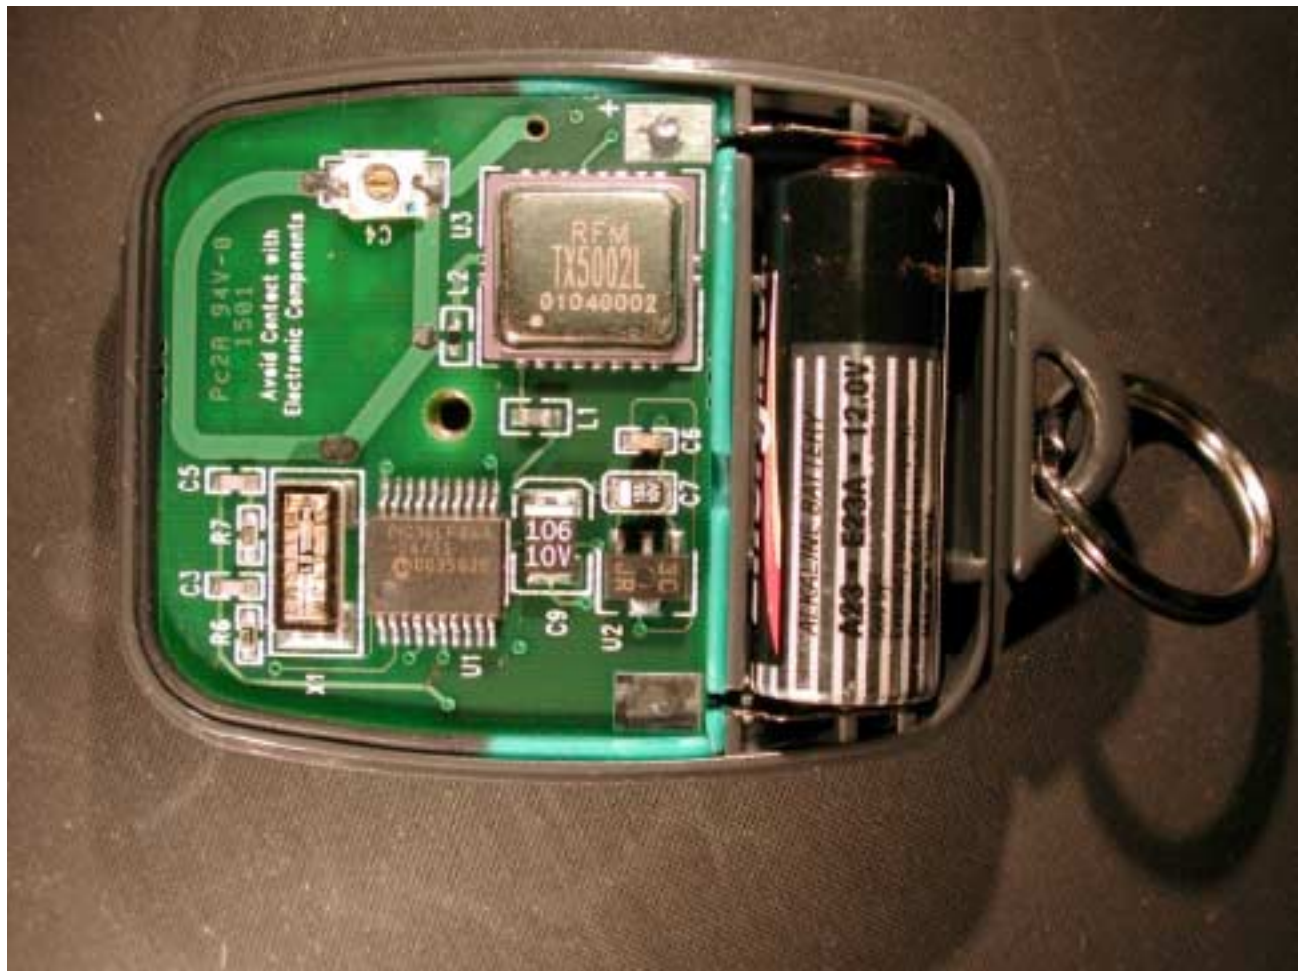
MMT500 508 Remote Transmitter PCBA in Case
